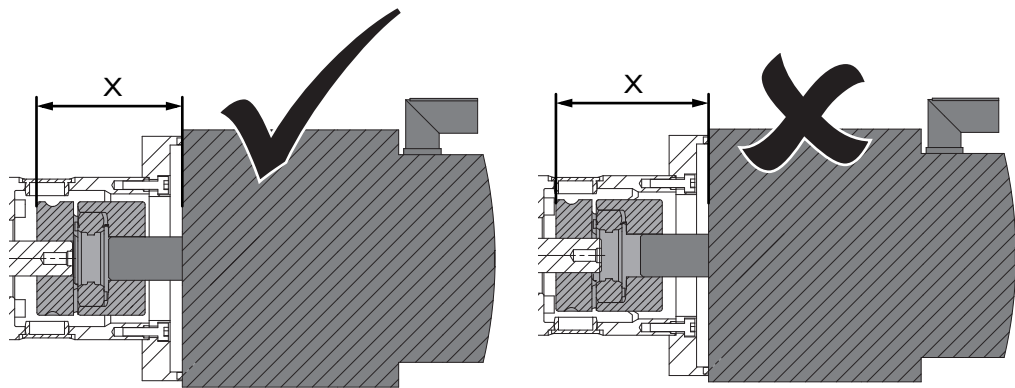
Position the coupling on the motor shaft: Make use of X dimension tolerance
